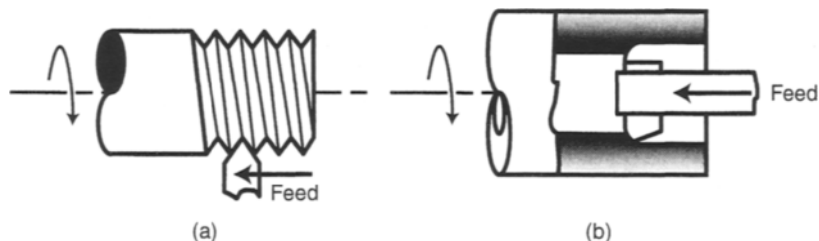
Illustration of (a) thread cutting and (b) boring.
